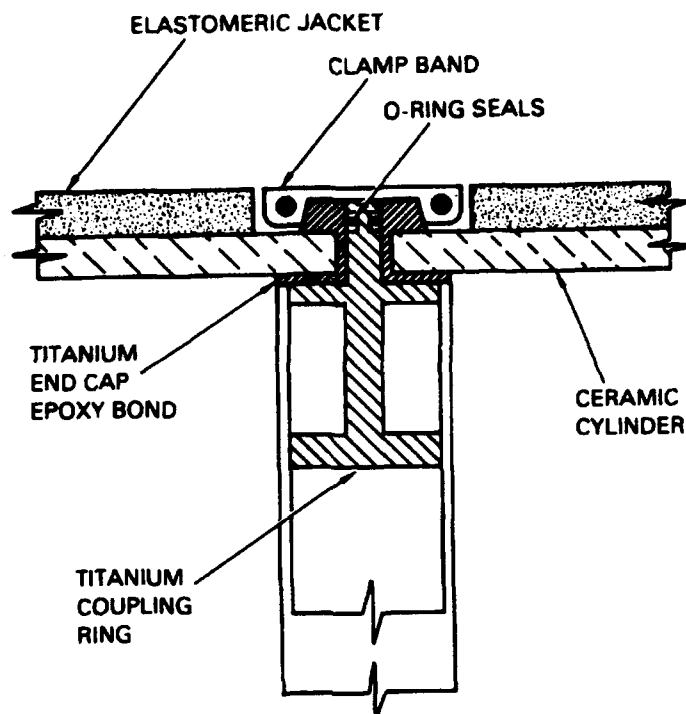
Arrangements for joining ceramic cylinders consisting of Mod 0 end caps, removable joint ring stiffener, and external split wedge band clamp.
